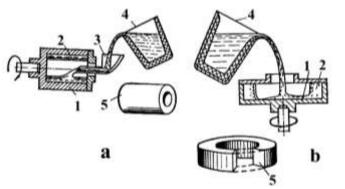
Centrifugal casting with horizontal (a) and vertical(b) axes of rotation: 1 – mould; 2 – liquid metal; 3 – spout; 4 – ladle; 5 – casting
